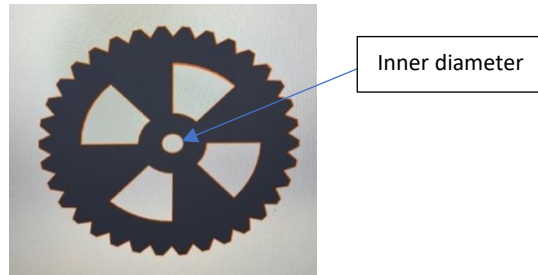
Flywheel's inner diameter that is attached to the motor's shaft.
